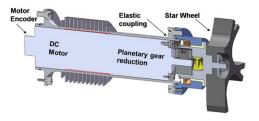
The motor module houses a DC brushed motor and gearbox and is passively cooled, which allows the motor to be used over specification for short bursts. Further, the elastic coupling increases the flexibility of the wheel/leg construction.
